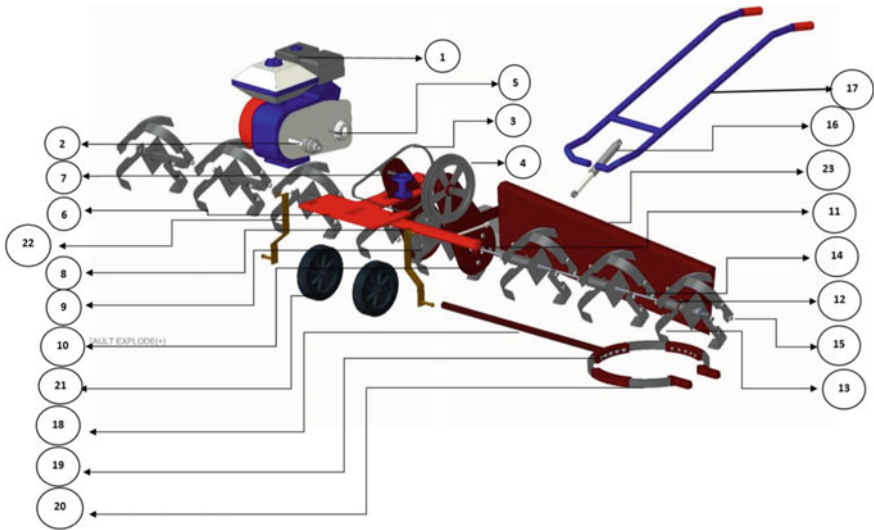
Exploded view of the mini tiller-cum-basin-maker
